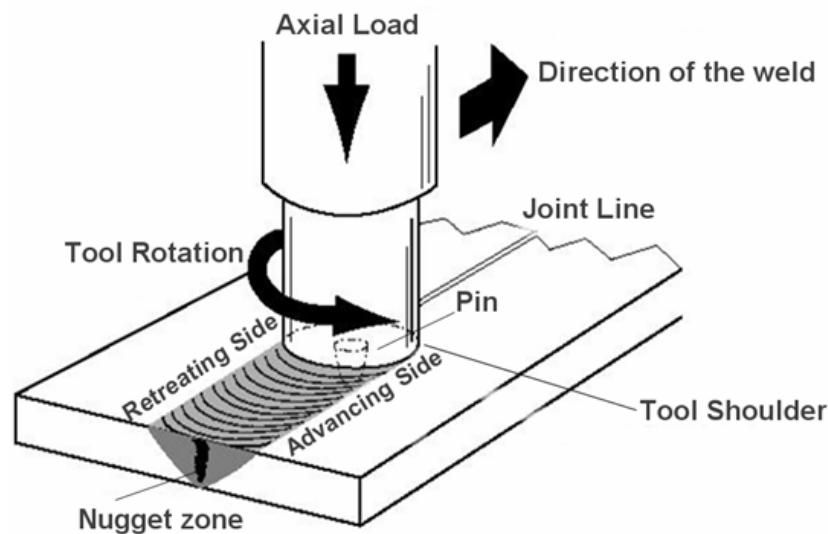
Schematic of Friction Stir Welding.
